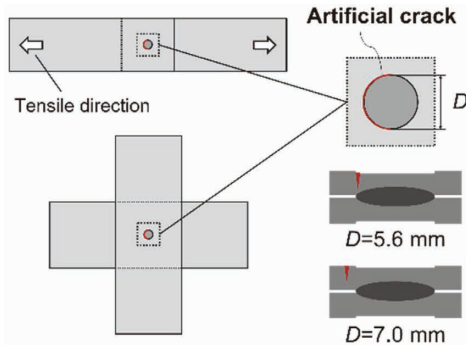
Schematic illustration of creating artificial crack in welds
